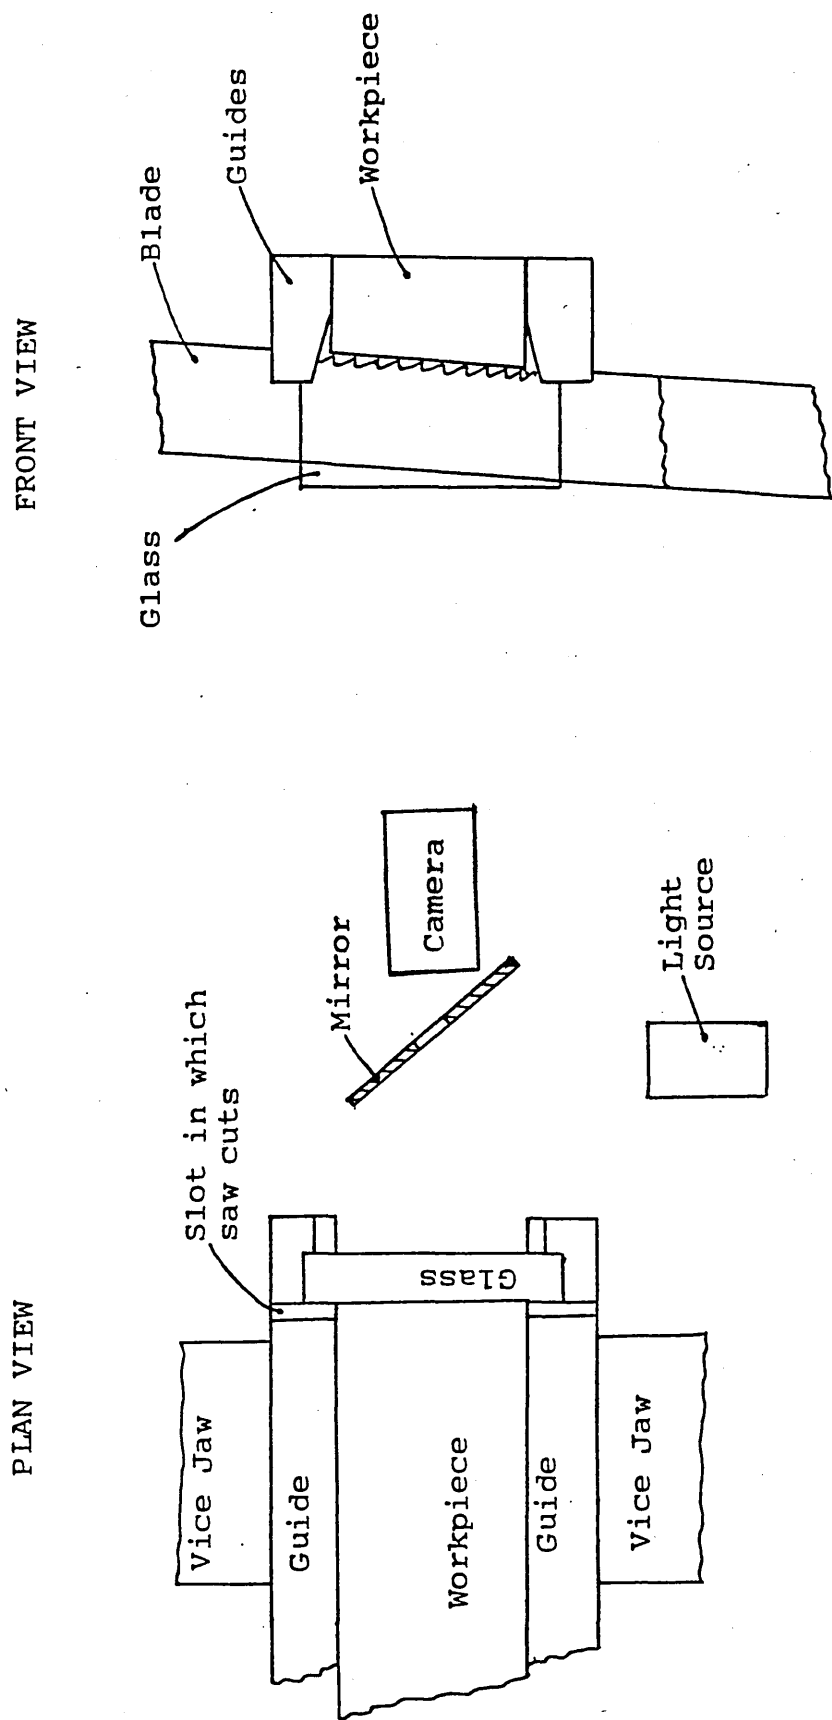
Set up for high speed filming of a hacksaw blade cutting in a power hacksaw machine
